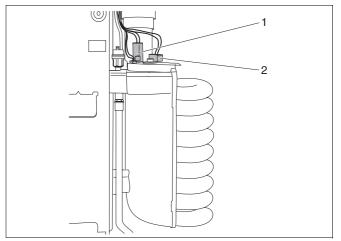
Remove the hot surface ignitor and ionisation electrode
